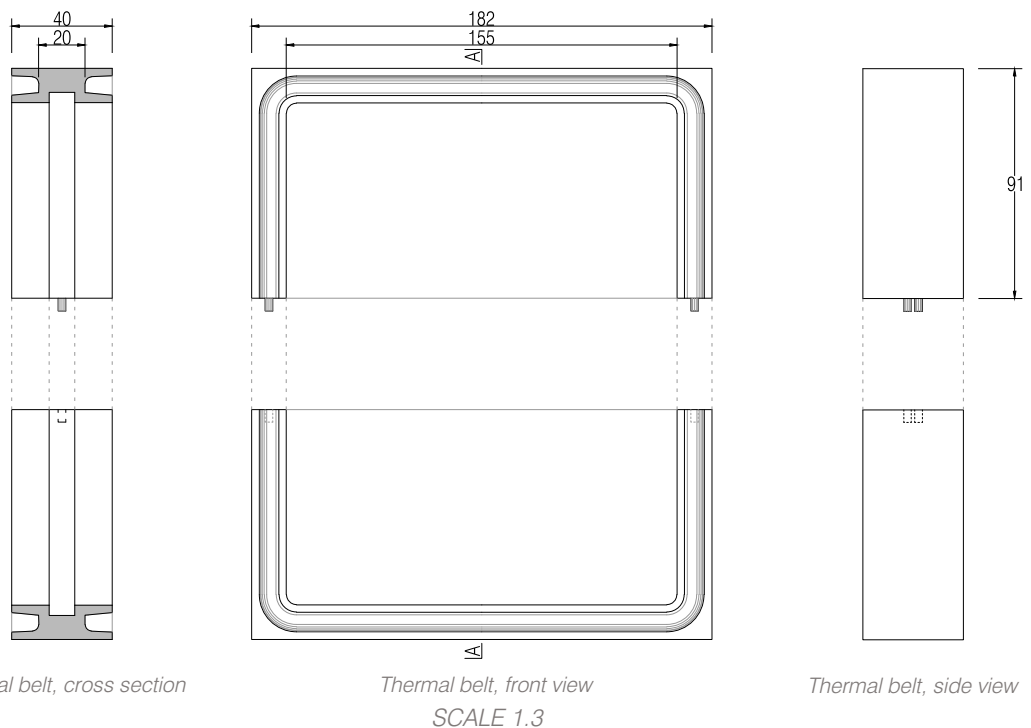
The thermal belt, developed for assembly with Q19 glass shells
